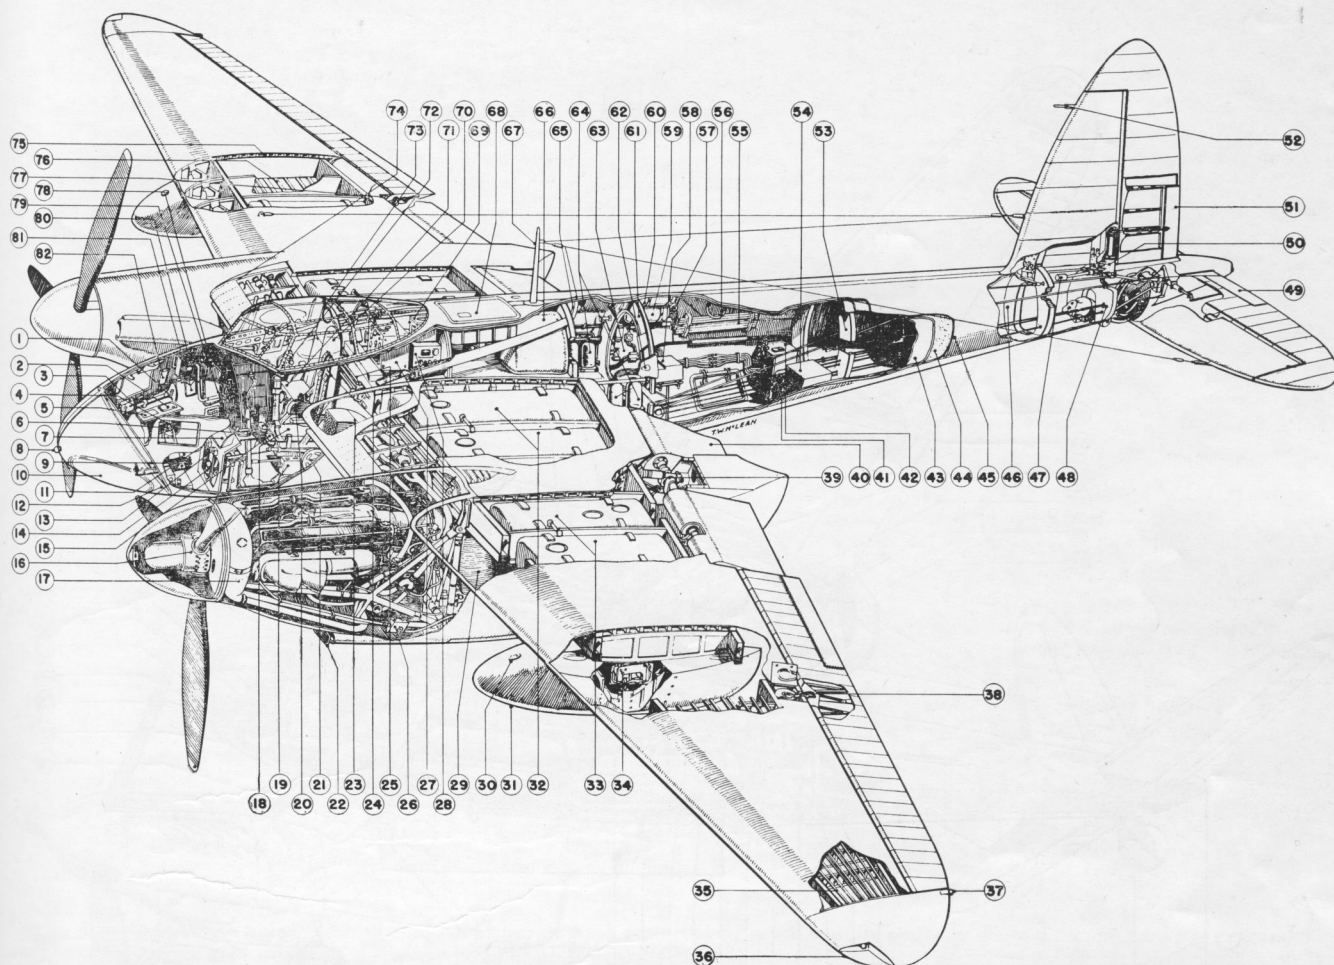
Upper and lower sectional view of Mosquito: (1) fireman's ax; (2) bombardier's elbow pad; (3) intercommunication; (4) portable oxygen bottle; (5) bombardier's writing pad; (6) pilot's compass; (7) parachute stowage; (8) navigation headlight; (9) bombsight; (10) bombardier's window; (11) impact switch; (12) Plexiglas nose; (13) gravity switch; (14) fire extinguisher; (15) pilot's thigh rests; (16) hydro-matic propeller; (17) coolant header tank; (18) pilot's seat; (19) intercommunication; (20) engine controls; (21) elevator trim tab handwheel; (22) carburetor air intake; (23) oil and coolant radiators; (24) pilot's harness; (25) throttle and propeller controls; (26) oil trap; (27) radio transmitter; (28) radio compass; (29) oil tank; (30) dump tank filler cap; (31) dump tank; (32) inboard fuel tanks; (33) outboard fuel tanks; (34) dump fuel tank release gear; (35) stringers; (36) navigation lamp; (37) identification lamp; (38) aileron control; (39) flapjack and crank; (40) flaps; (41) rear camera; (42) stowage for camera-heating cables; (43) plywood inner skin; (44) balsa; (45) plywood outer skin; (46) bulkhead 6; (47) rudder mass balance; (48) bulkhead 7; (49) trim tab; (50) rudder linkage; (51) trim tab; (52) Pitot head; (53) bulkhead 5; (54) camera-mounting boxes; (55) spike pickets; (56) DF loop; (57) lamp; (58) radio; (59) compressed air container; (60) deicing fluid tank; (61) bulkhead 4; (62) ground starter plug; (63) pneumatic-hydraulic panel; (64) oxygen bottles; (65) hydraulic tank; (66) long-range oil tank; (67) aerial mast; (68) dinghy stowage; (69) antenna loading unit; (70) pilot's armor; (71) observer's seat; (72) trailing aerial winch; (73) observer's armor; (74) oil and coolant radiators; (75) double top skin and stringers; (76) single underskin and stringers; (77) aileron tab control; (78) observer's demand oxygen regulator; (79) instrument panel; (80) camera temperature gauge box; (81) camera leads stowage; (82) inspection lamp stowage;
